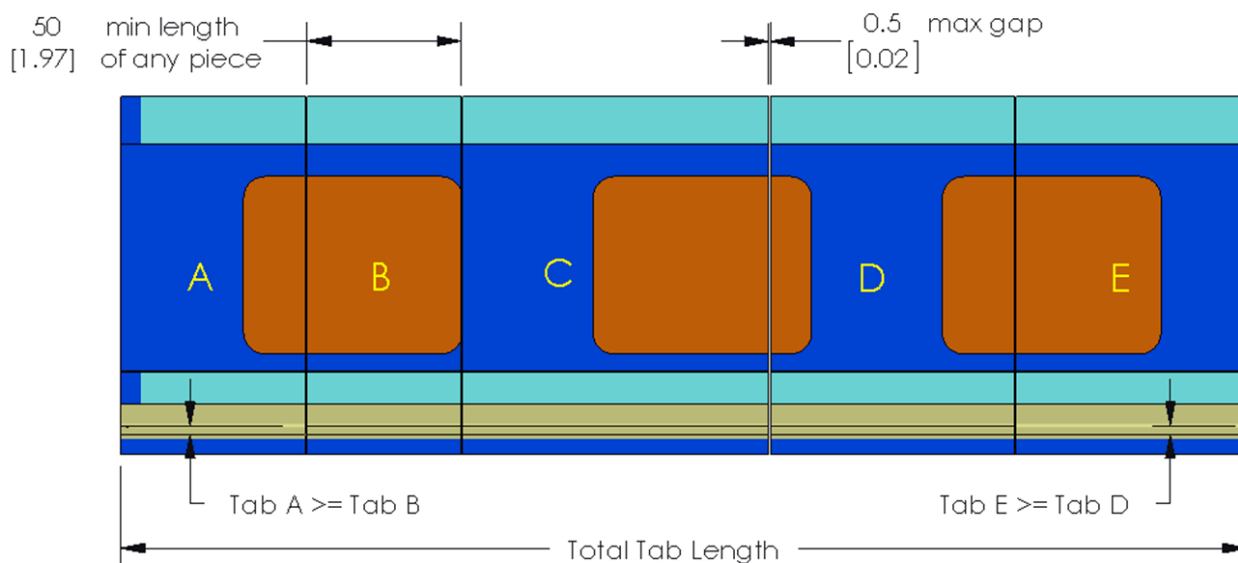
Generic Multi-Piece Payload (dimensions mm [in])
